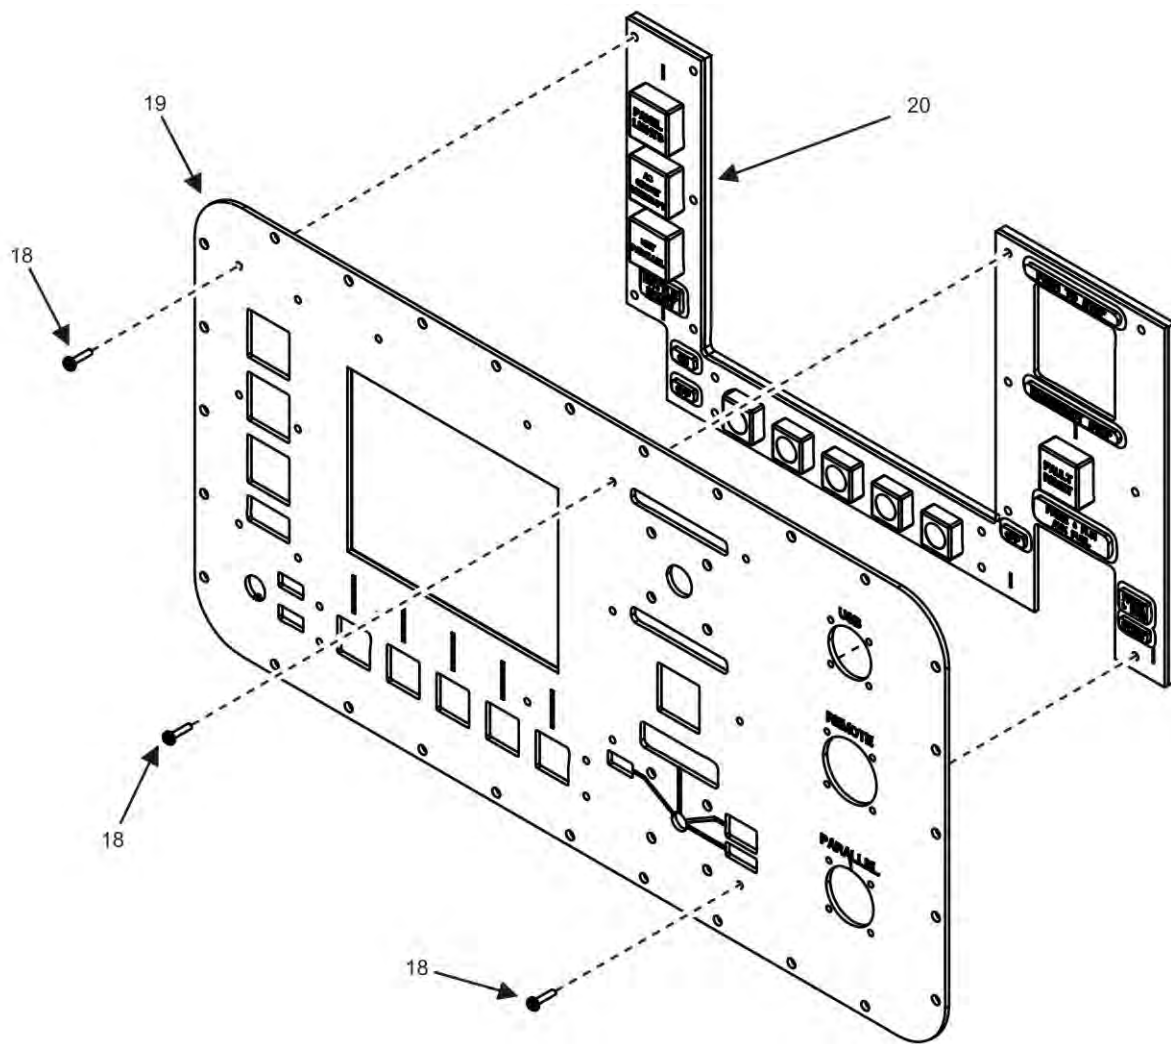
DCS Control Panel Assembly (Sheet 4 of 6).
